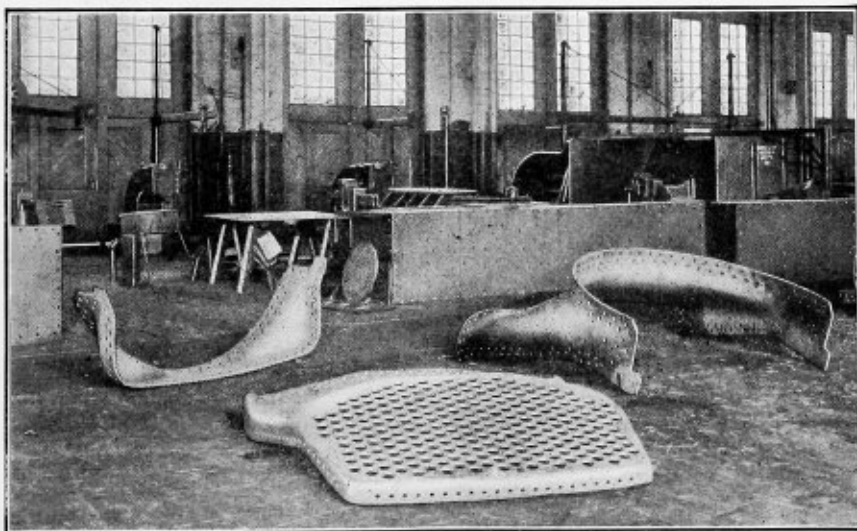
TUBE, HIP AND THROAT SHEETS, STANDARD ATLANTIC TYPE PASSENGER ENGINE.
